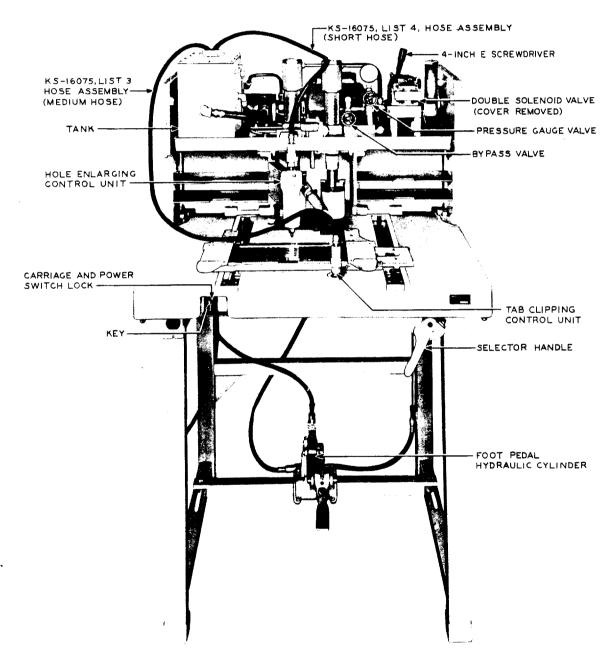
Filling and Bleeding 659A and 659D Tools (front view of tool)
